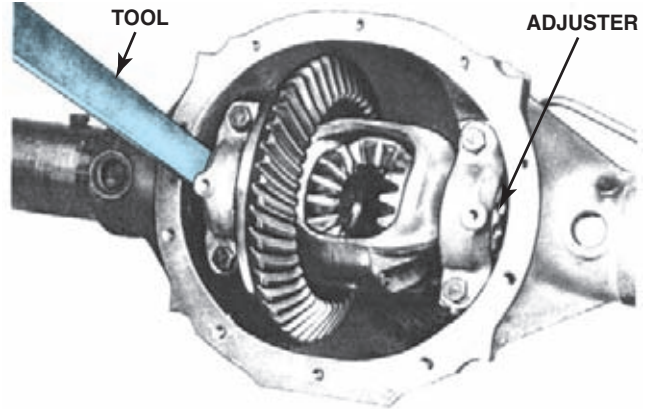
Loosening the threaded adjusters removes the pre-load and allows for easy removal of the adjusters and bearing caps. Keep each set of bearing cup, cap, and adjuster separate to ensure reinstallation onto the proper side. (Courtesy of DaimlerChrysler Corporation)
